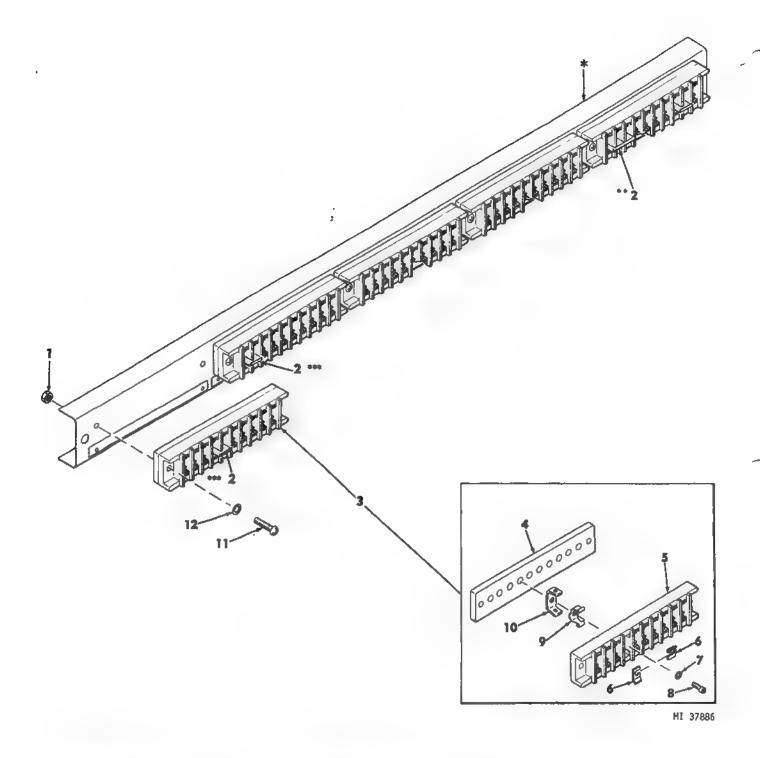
CONNECTOR. PLUG. ELECTRICAL ASSEMBLY /11067515 /SEE FIGURE 23 FOR NEXT HIGHER ASSEMBLY/
